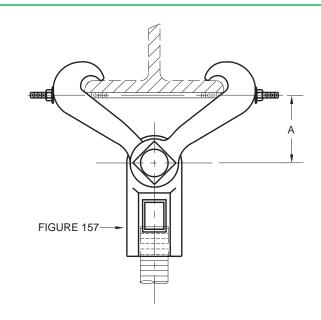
ADJUSTABLE BEAM CLAMP
